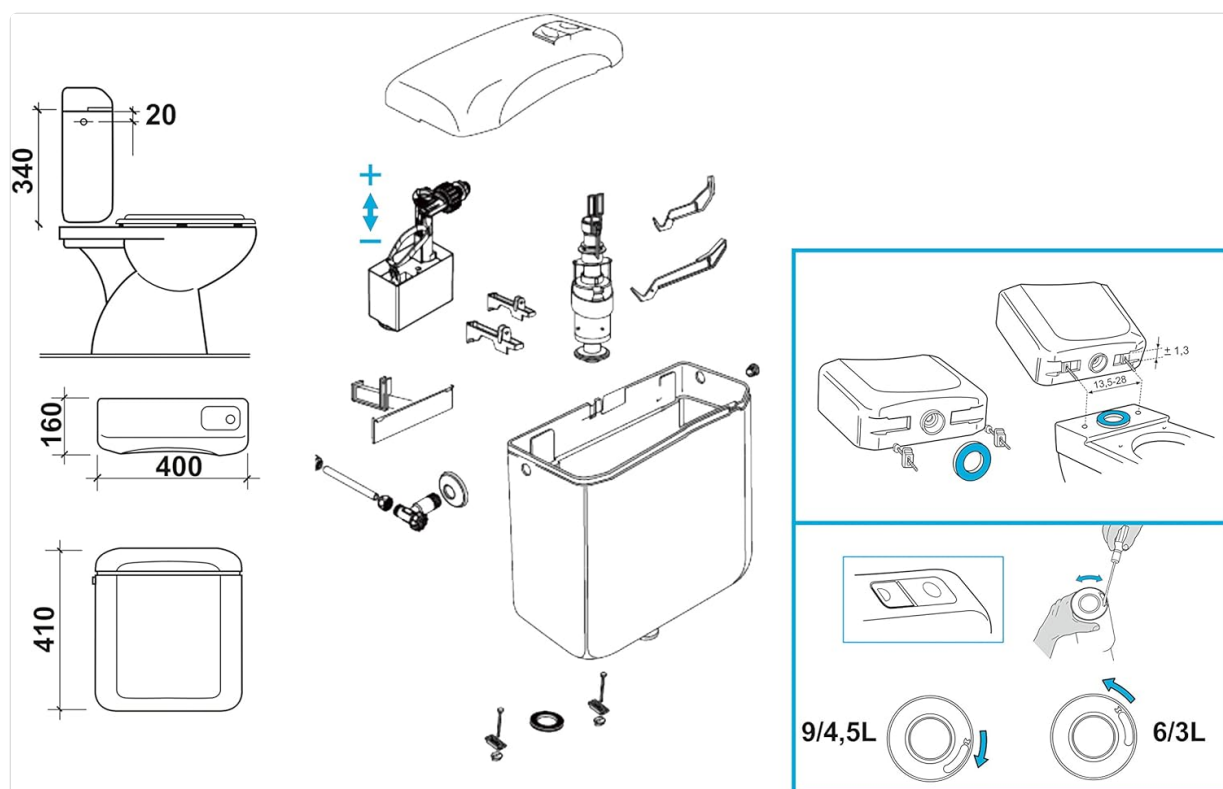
Technical diagram illustrating cistern dimensions, an exploded view of internal components, and flush volume adjustment mechanism.
